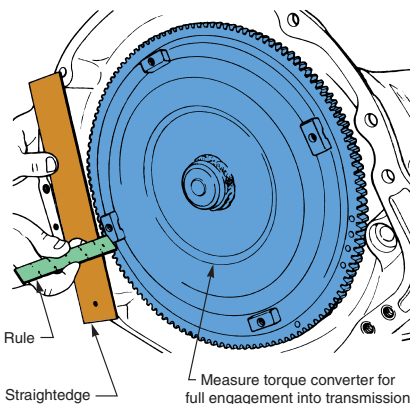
After installing the torque converter, make sure it is completely seated on the input shaft and stator shaft. Also, make sure the lugs on the pump drive hub are fully engaged in the front pump. Measuring the installed depth of the torque converter with a rule and straightedge as shown helps verify that installation is correct. (DaimlerChrysler)
